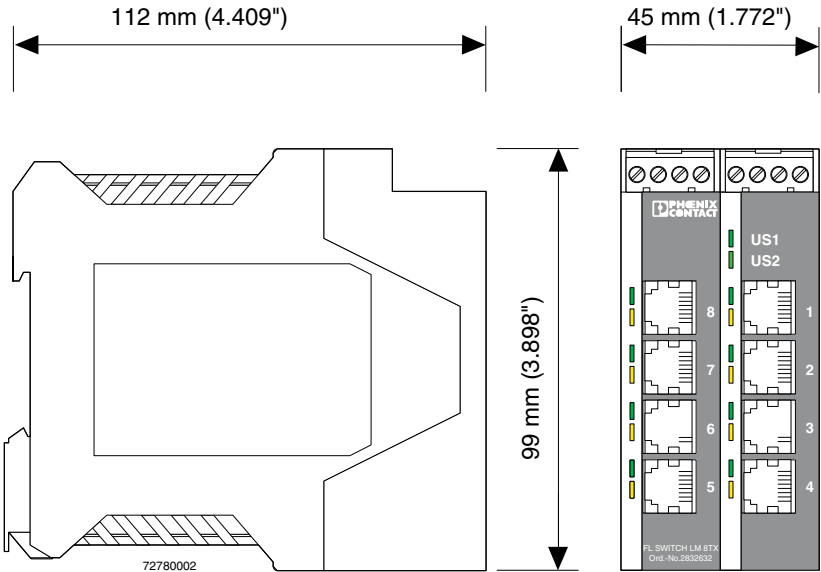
Housing dimensions of the LMS in millimeters (inches)
